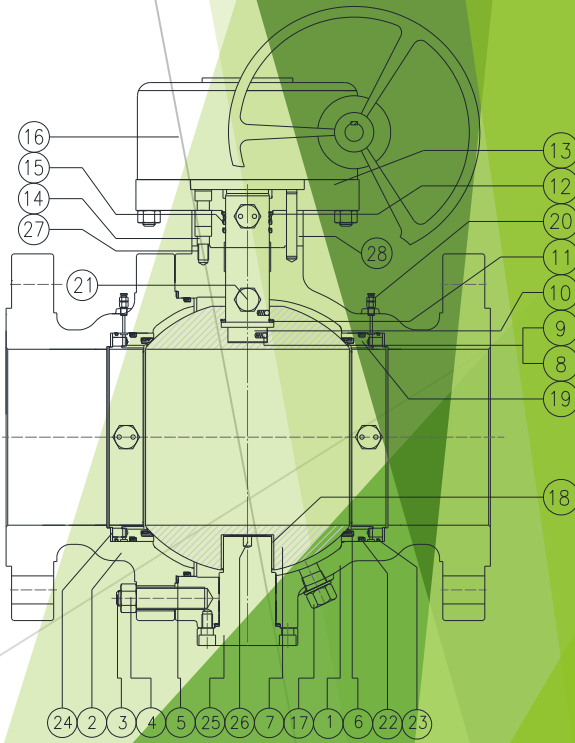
Typical Trunnion-mounted Ball Valve Components (Split-body Valve Illustrated)
